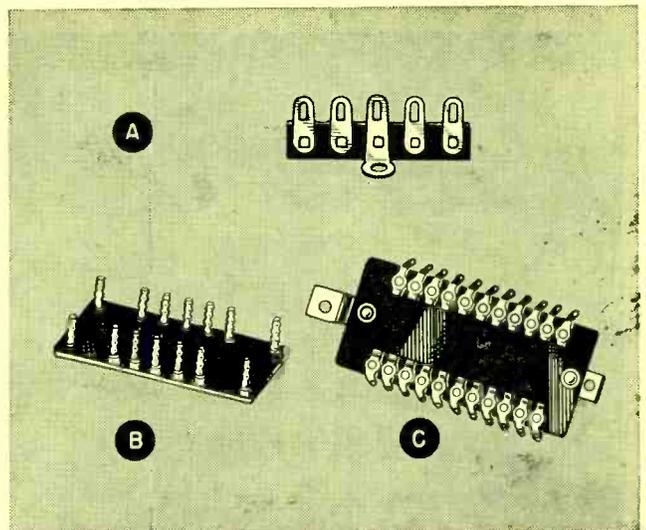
Component board types include free-standing type (A), turret (B) and pancake types (C)
